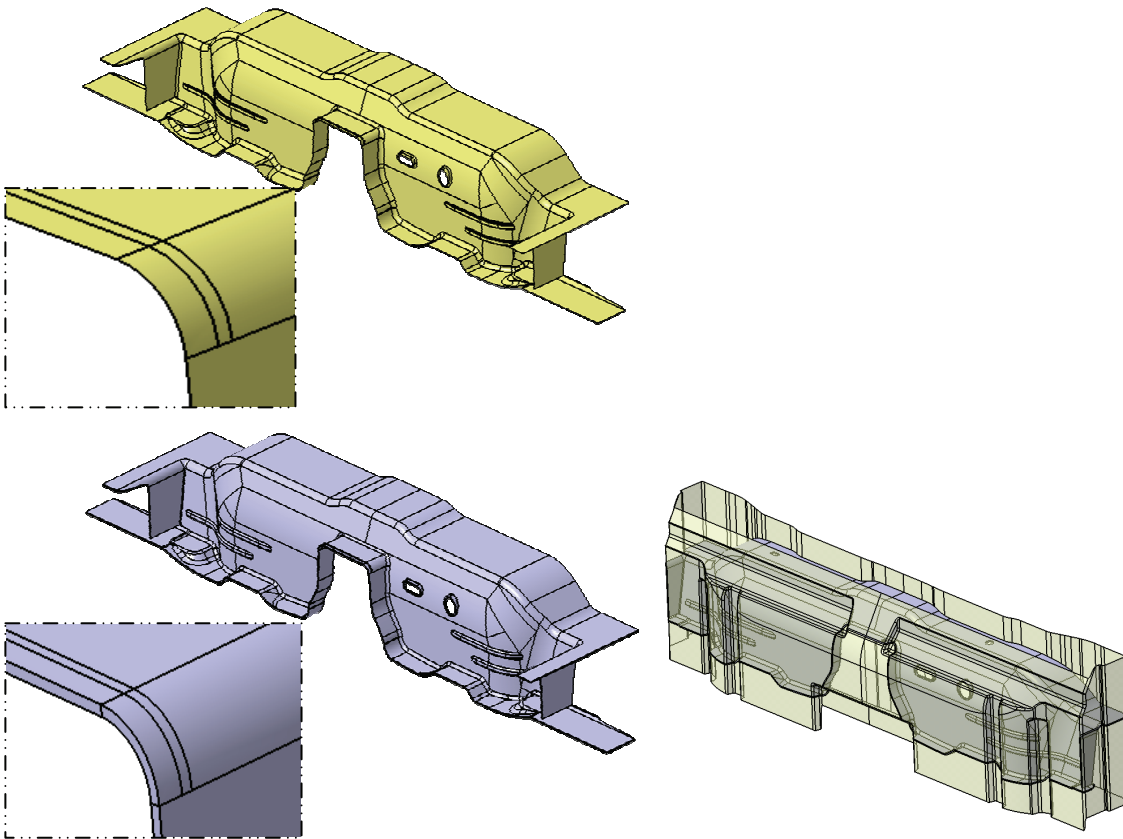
The surface model of the sheet metal part (yellow) is thickened in the direction of the sheet thickness vector to become a solid model (grey) and be trimmed by the cutting surfaces model (beige) (Brill, 2006)
